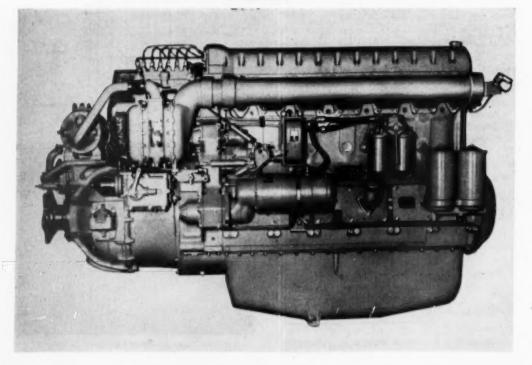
Packard 6-cylinder 300 hp. engine combined with a 3.2:1 reverse and reduction gear. Harrison intercooler top left. Leece-Neville electric starter center. Both filters shown are Fram.
